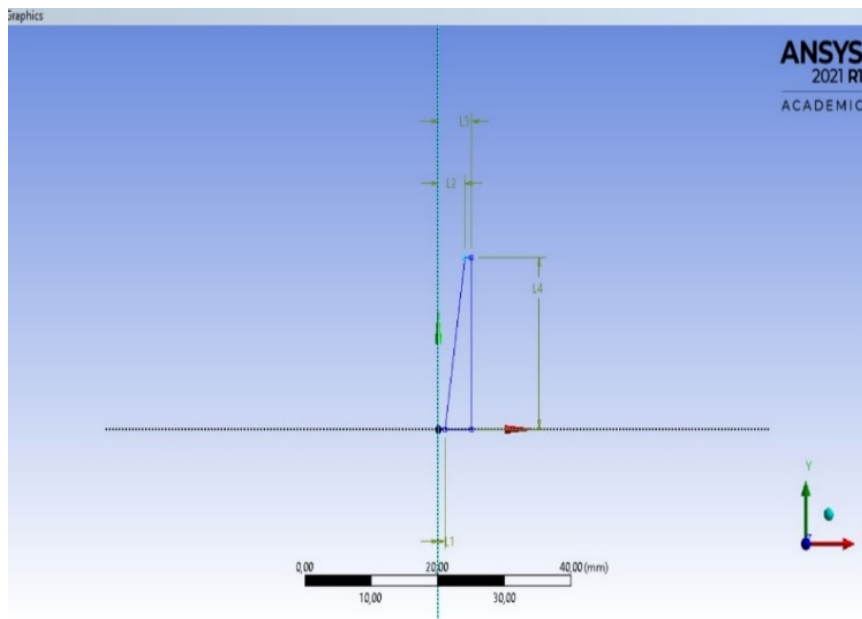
Two Dimension Drawing in the Design Modeler Section.
